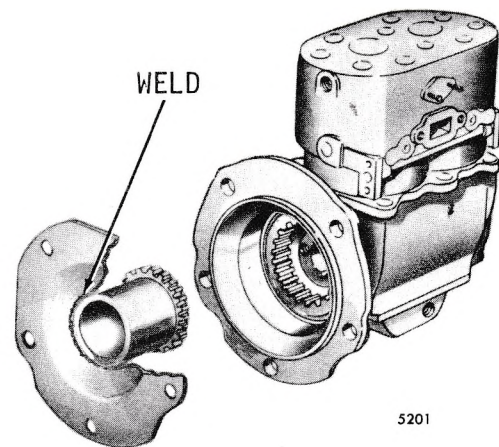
Fixture For Holding Drive While Installing or Removing Slotted Nut
